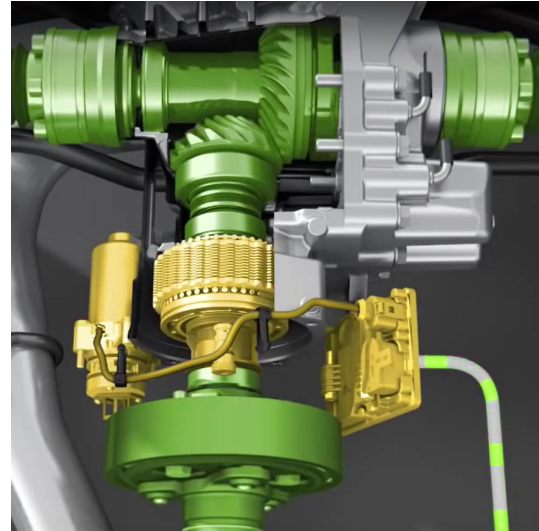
Coupled Haldex clutch. The hydraulic pump is engaged. The clutch plates are pressed together, coupling the rear axle to the engine [1].
